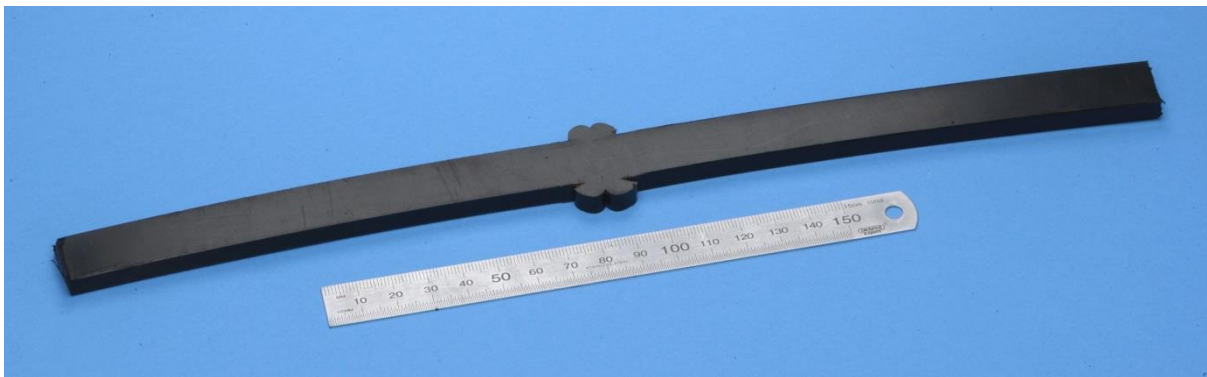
Guided side bend test specimen based on ASTM F3183-16 (2016d)
